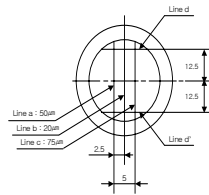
Stainless steel die for testing dimensional change and rubber ring for stone die.
